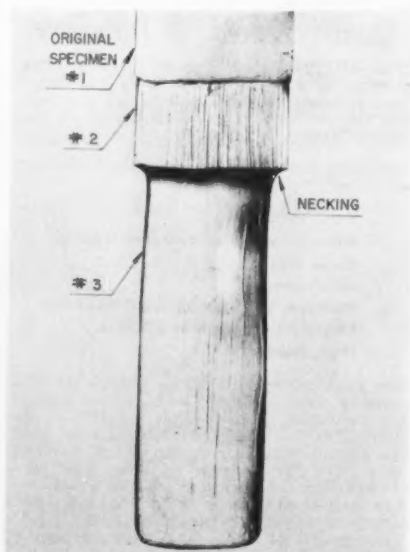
This illustration shows the results of chemical machining on a 6-inch specimen.
